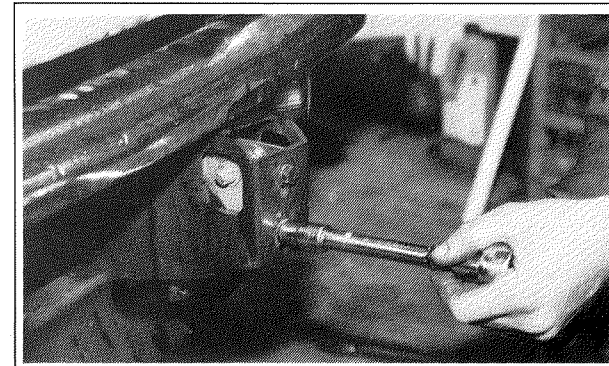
To gain access to the last bumper bolts, remove the bonnet from the chassis hinge box by undoing the bolts shown. Two of you will be needed to lift the bonnet clear. Make sure nothing snagging like the headlamp wires or the bonnet stay. The bonnet weighs a bit, so take your time, wear gloves if the arches are rusty and make sure you have a clear space to store it.
